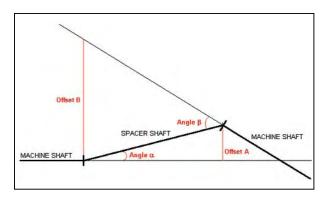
Methods for specifying maximum angle allowed between spacer shaft and connected machine shafts
